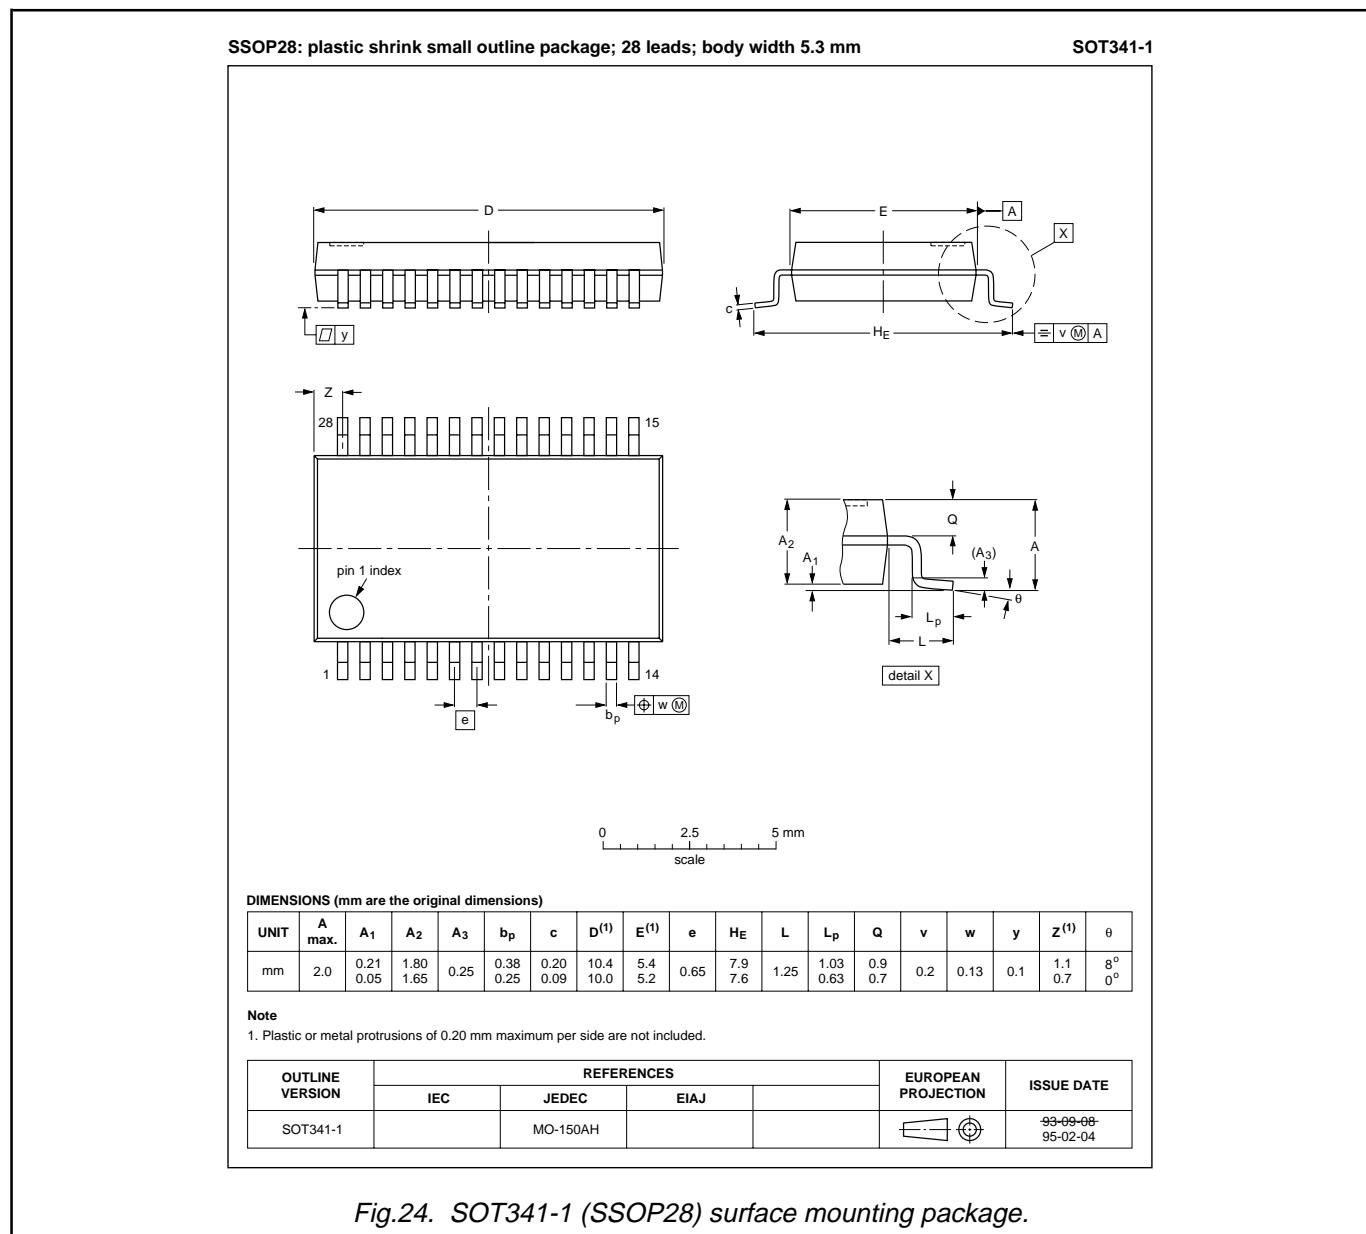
SOT341-1 (SSOP28) surface mounting package.
